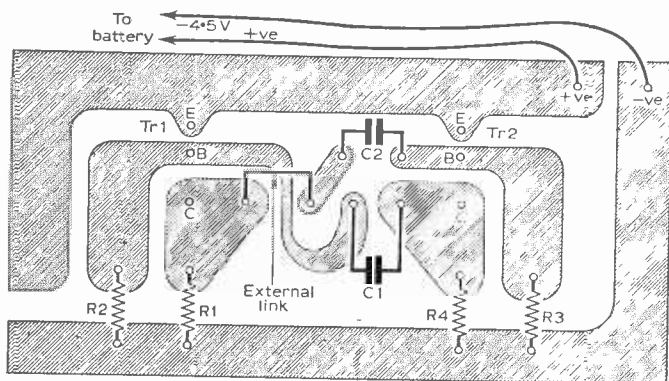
The final printed circuit master pattern. Compare with Fig. 1 and Fig. 2.
